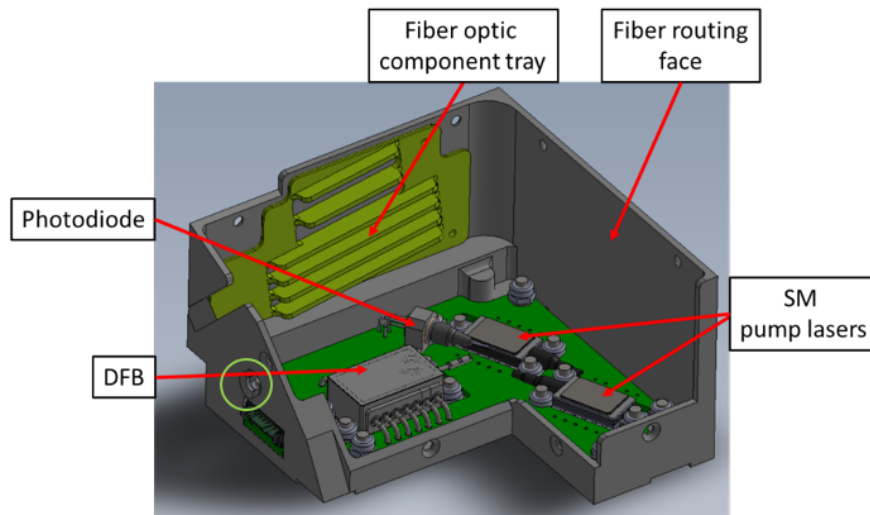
CubeCAT laser engine mechanical casing internal view.
